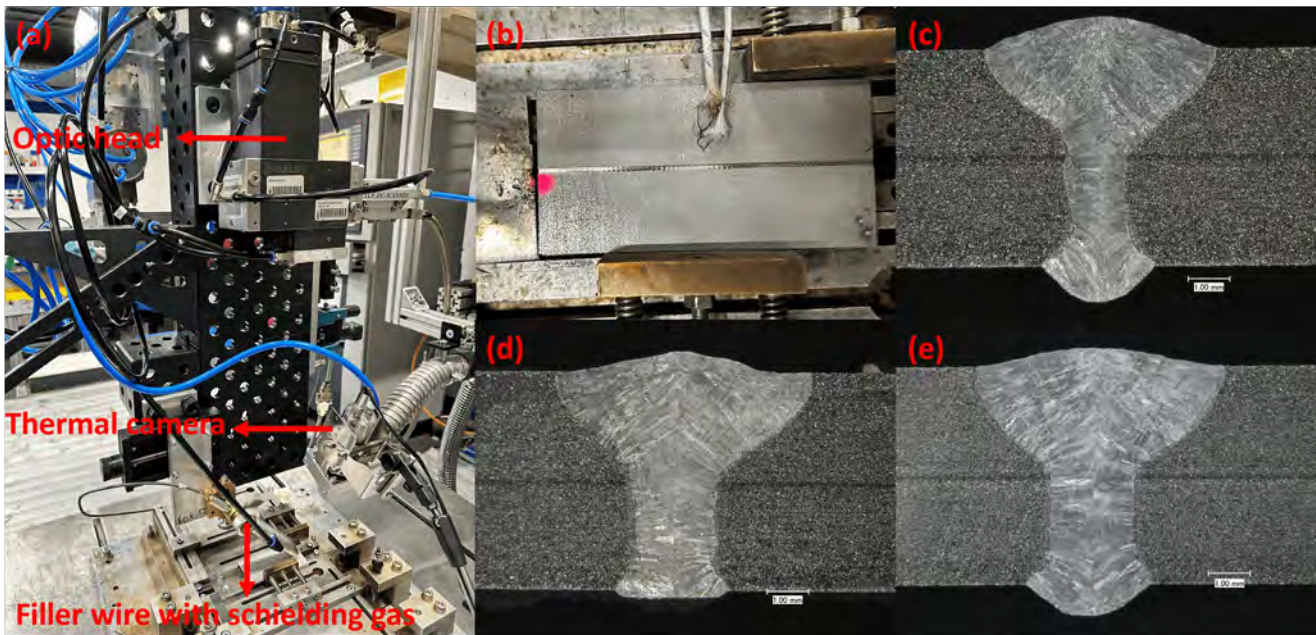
(a) Welding setup at Welding and Joining Institute of RWTH Aachen; (b) Workpiece with thermocouple; (c) Weld cross section for Cr 13%; (d) Weld cross section for Cr 14%; (e) Weld cross section for Cr 15%
